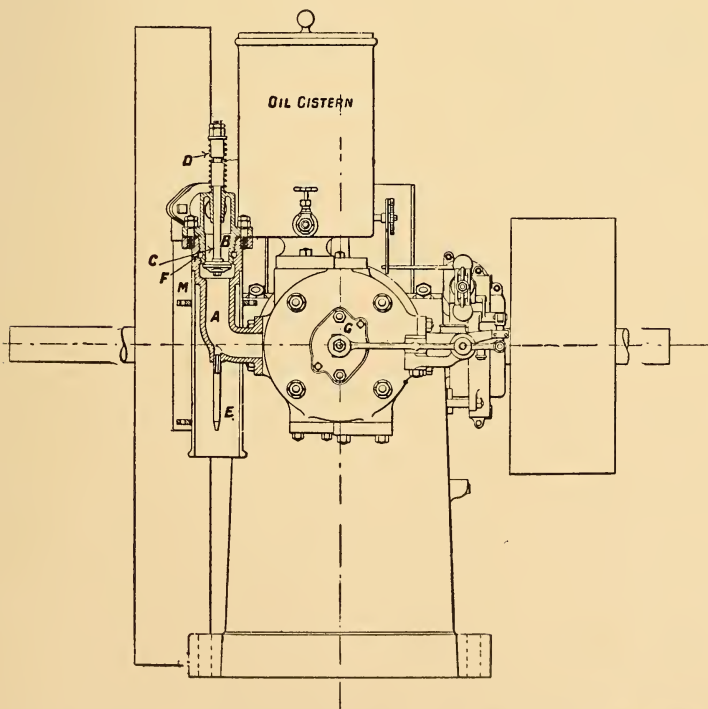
Campbell Oil Engine, illustrating operation of vaporizer
